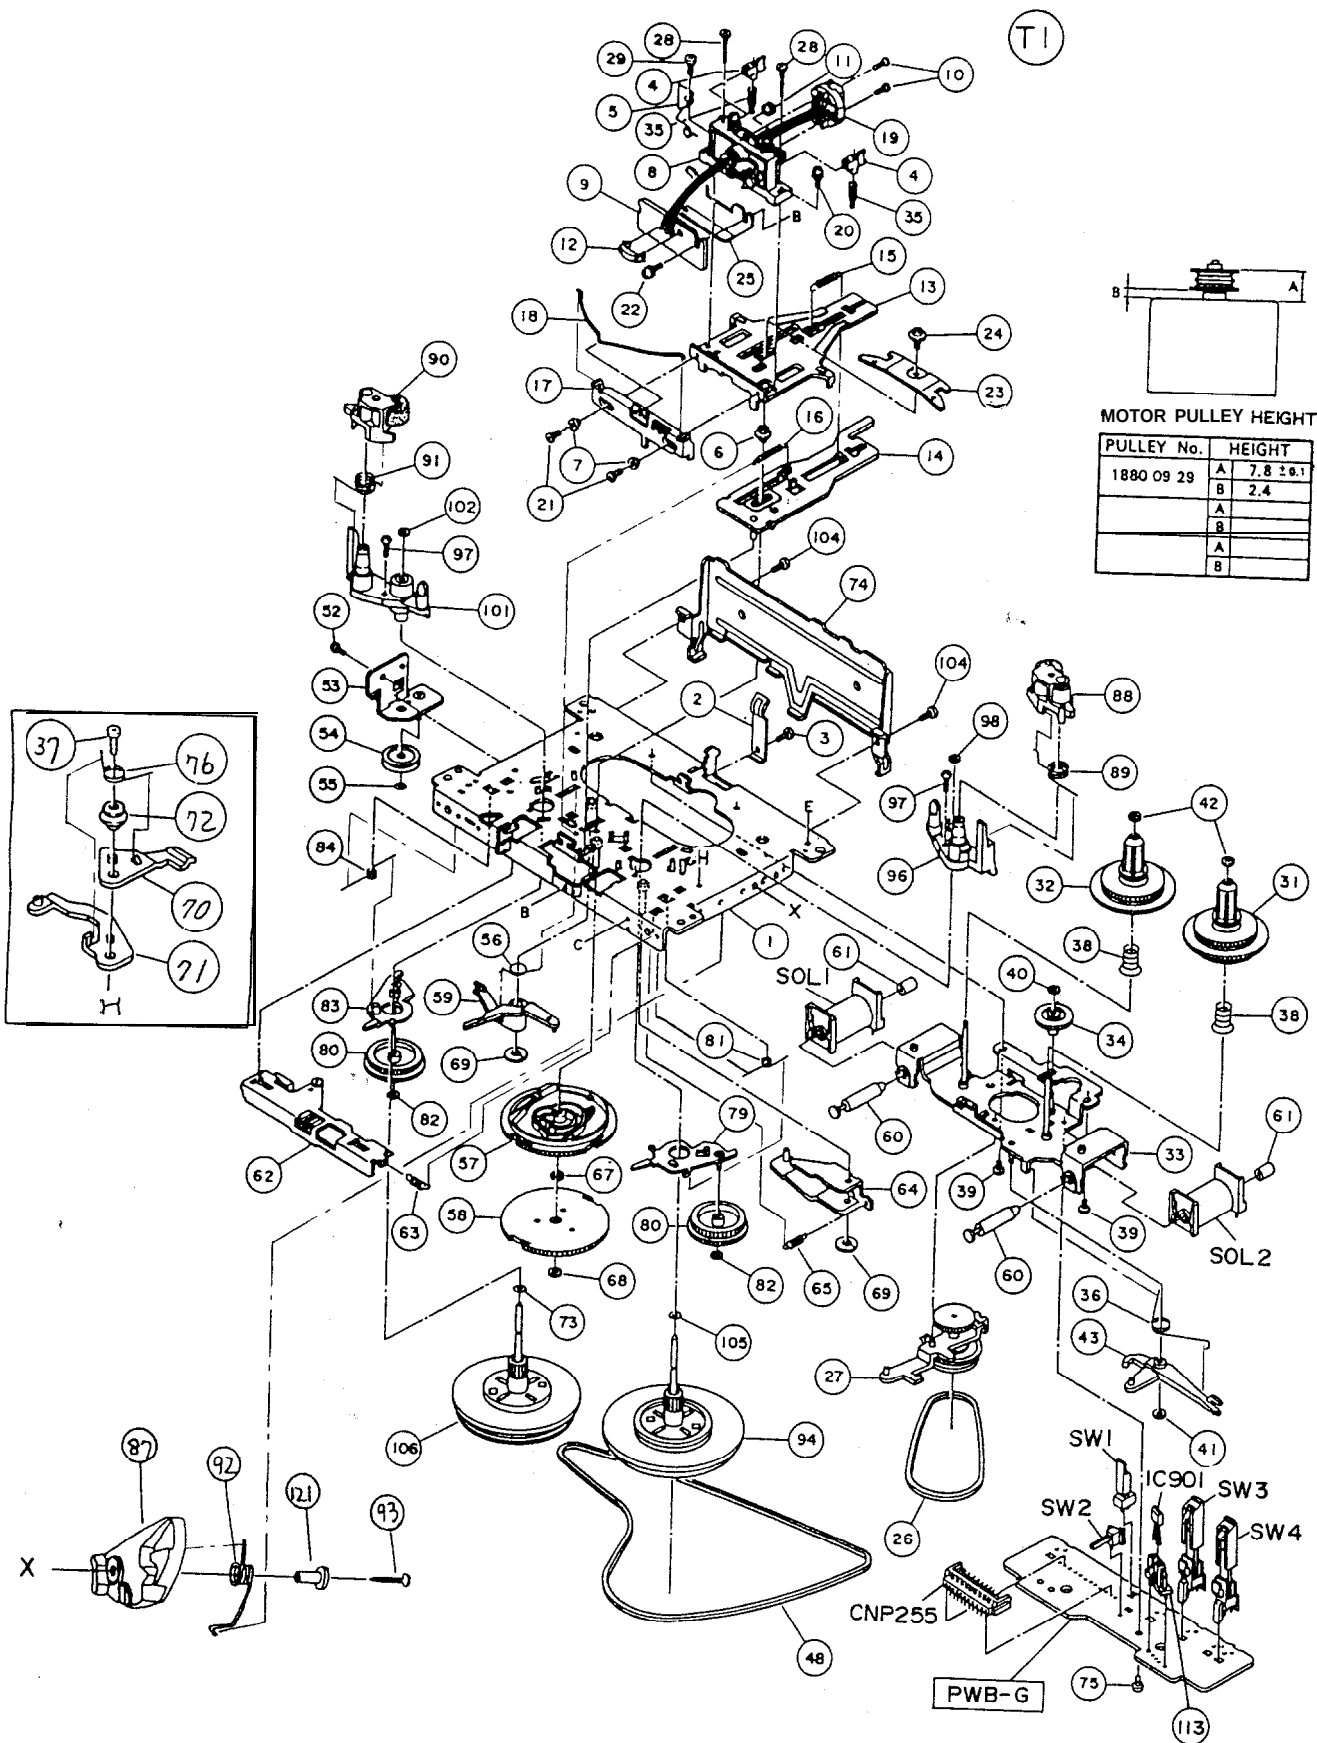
DECK MECHANISM EXPLODED VIEW (1/2)
